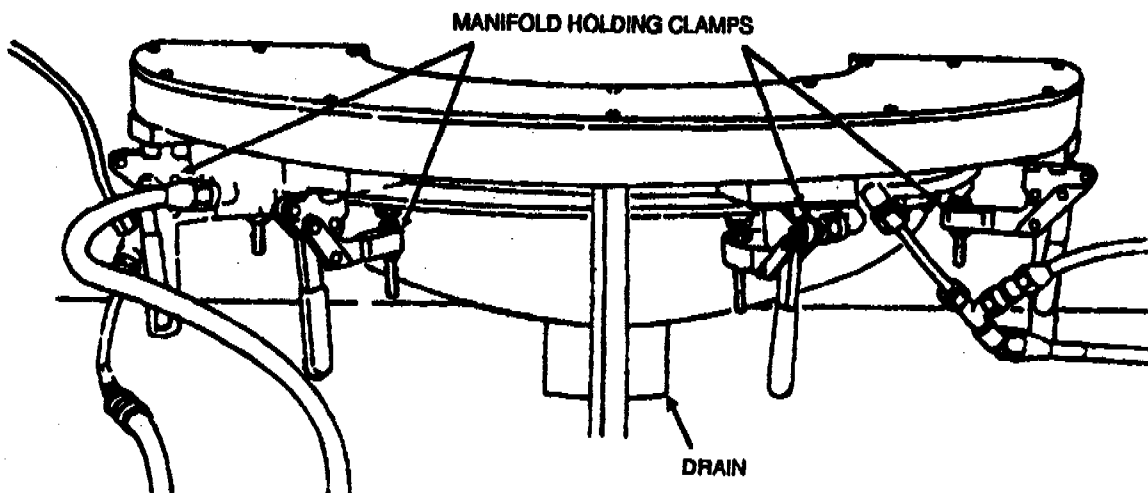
Fuel Manifold Assembly Test Fixture.
